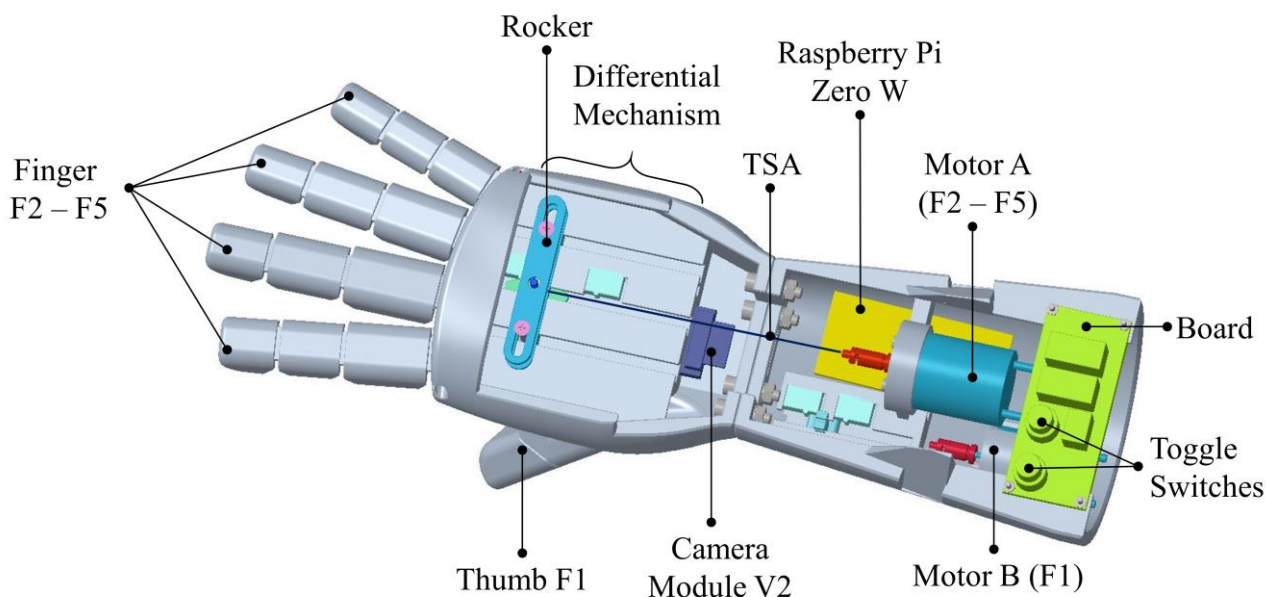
CAD rendering of the 3D printed hand prosthesis. Motor A drives the four fingers while Motor B is driving the thumb. The device is controlled through the PCB board depicted on the right. The differential mechanism assures smooth gripping of non-cylindrical objects. The camera module allows identification of objects in reach.
